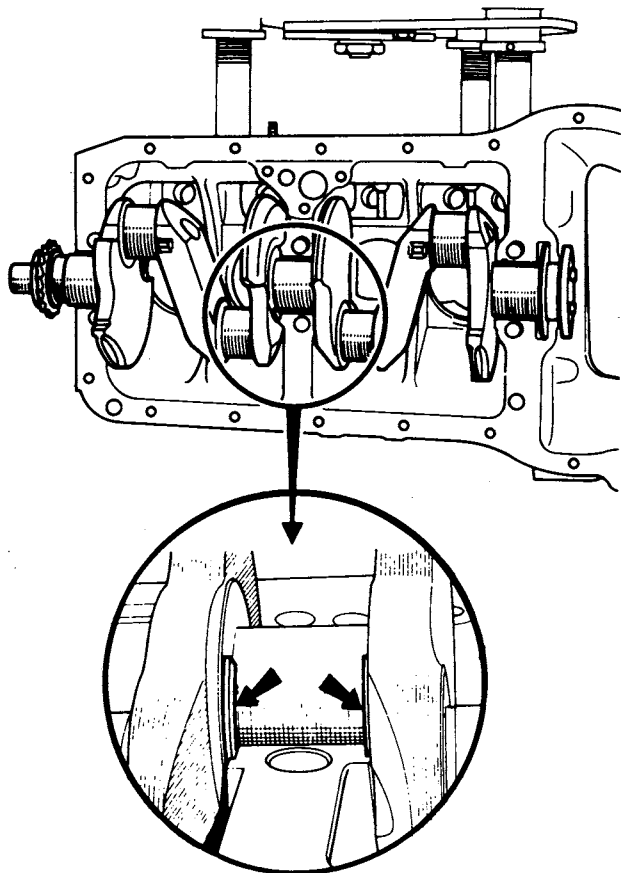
INSTALLING THRUST WASHERS ON CENTER MAIN BEARING
